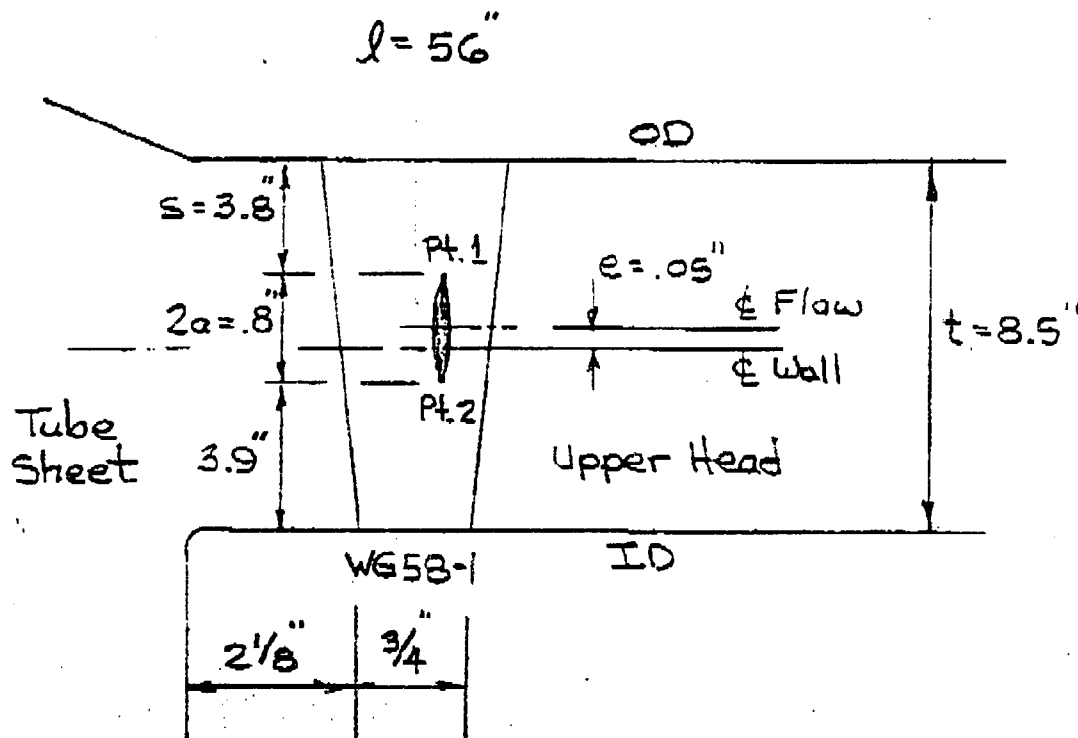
Geometry of the Upper Head-to-Tubesheet Weld and Indicated Flaw
